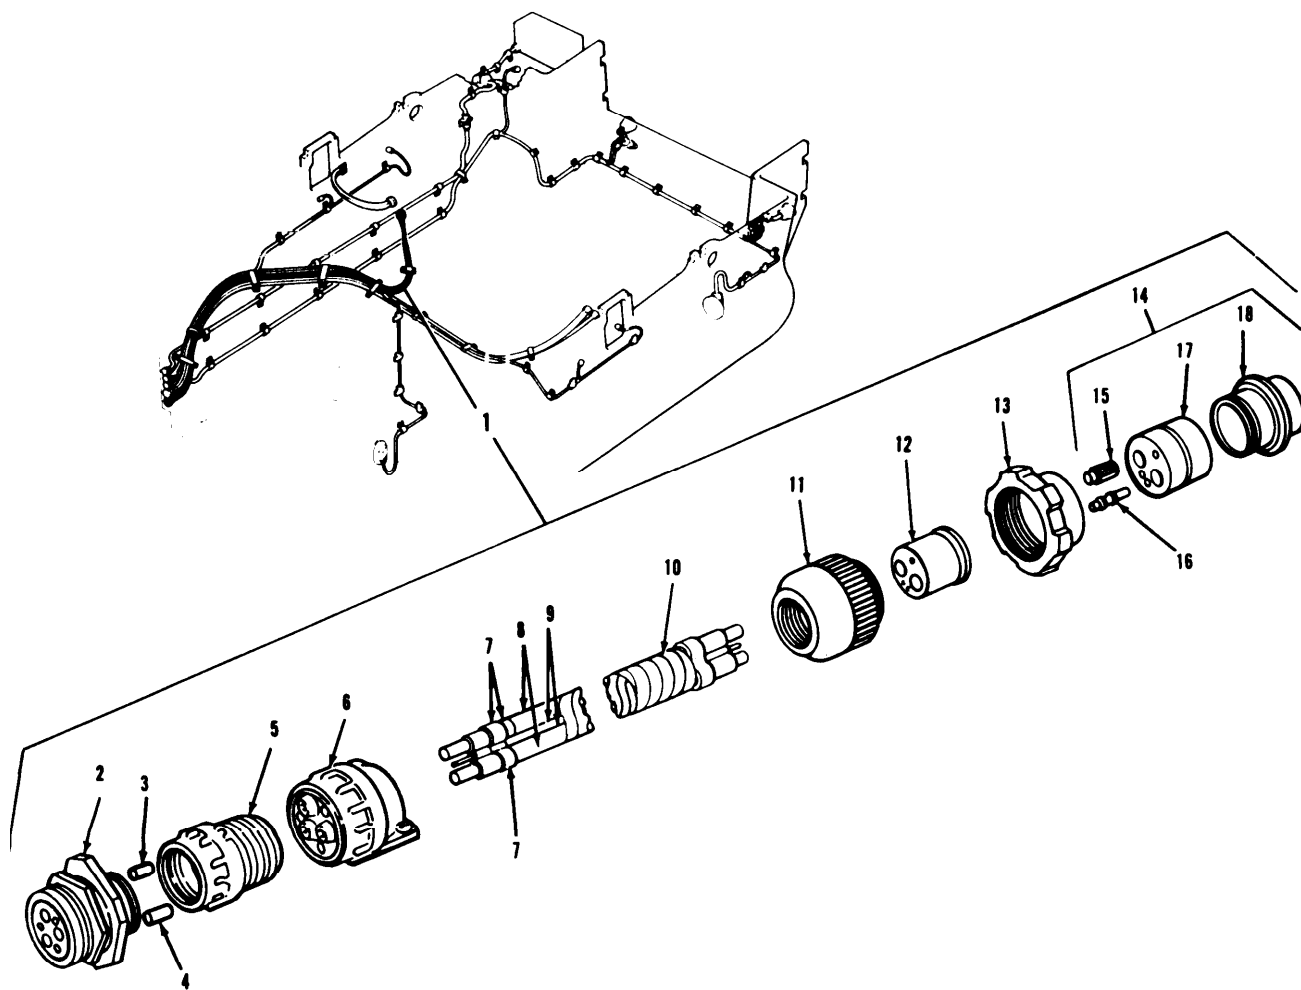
STARTER FEED HARNESS ASSEMBLY (2CA ENGINE).
